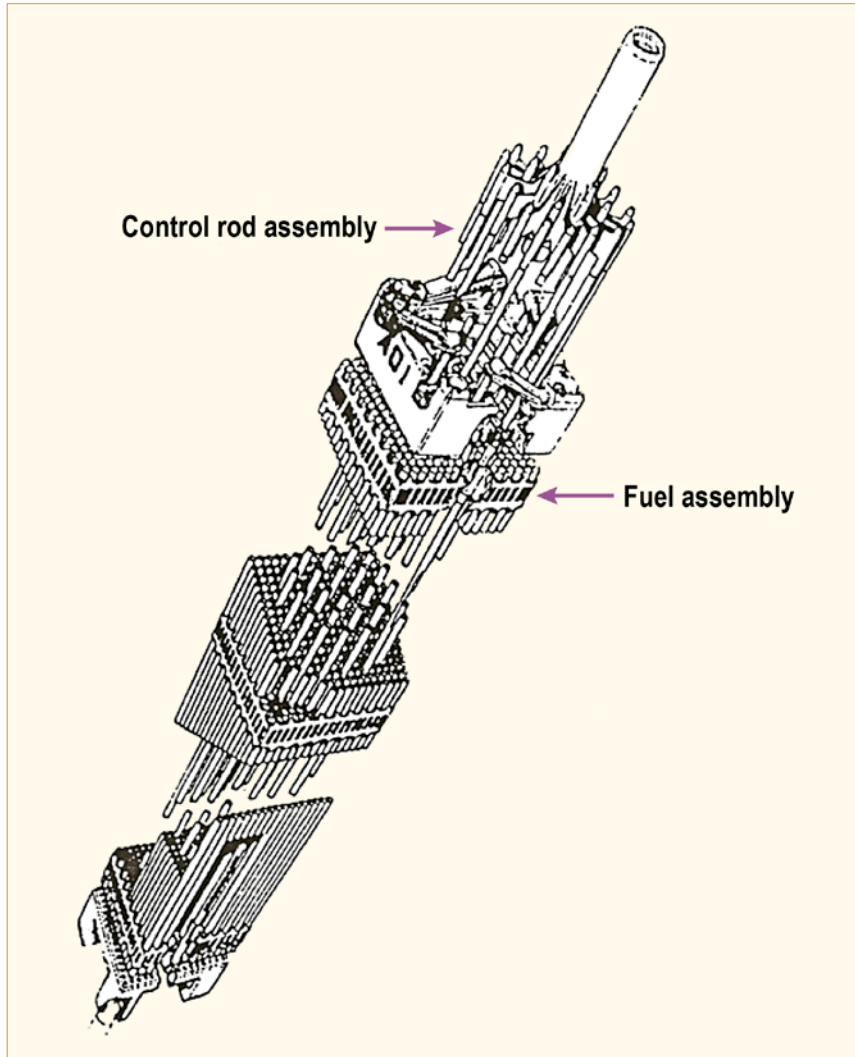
Control Rod Assembly (CA) and 17x17 Fuel assembly (AREVA, Framema).
